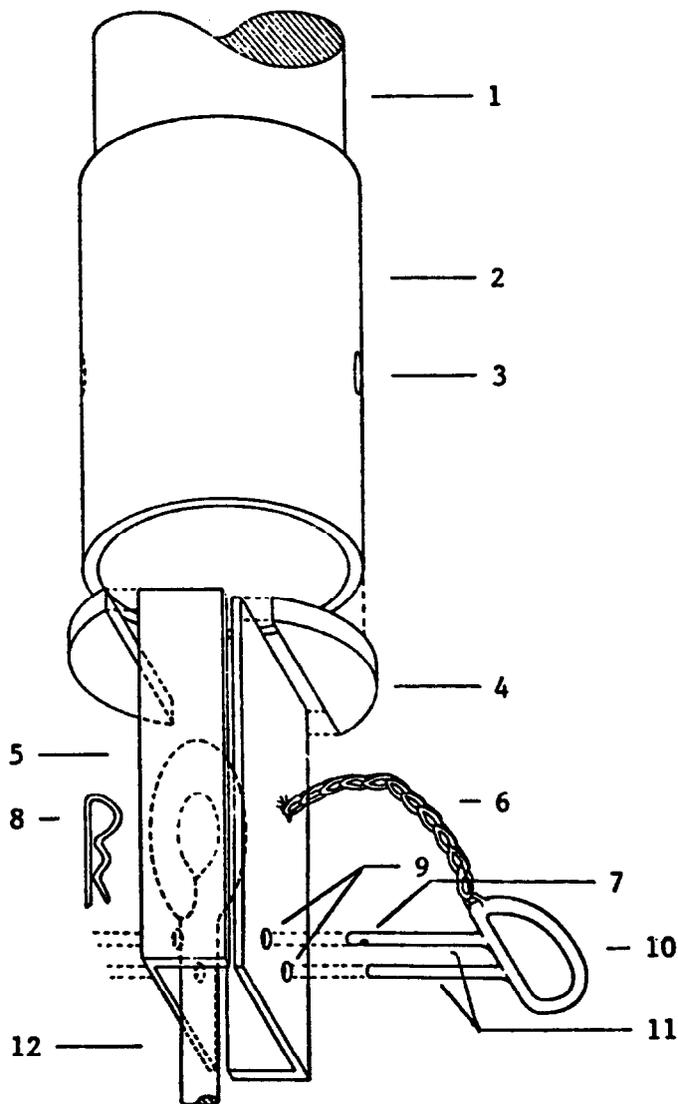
Adapter, exploded view. The numbers refer to the following: (1) auger shaft; (2) 2-5/8 inch (7 cm) I.D. well casing, length 4 inch (10 cm); (3) 3/8-inch (10 mm) hole; (4) 1/4-inch (6 mm) plate; (5) 1/4 inch (6 mm) by 1-7/8 inch (5 cm) angle iron, length 5 inch (13 cm); (6) 5-1/2 inch (14 cm) small chain; (7) 1/4-inch (6 mm) hole; (8) 1/8-inch (3 mm) by 1-1/4 inch (3 cm) spring locking pin; (9) 3/8 inch (10 mm) hole; (10) 1/4 inch (6 mm) by 8-inch (20 cm) cold-rolled steel; (11) 3/8 inch (10 mm) by 2-1/2 inch (6 cm) bolts; (12) earth anchor.
